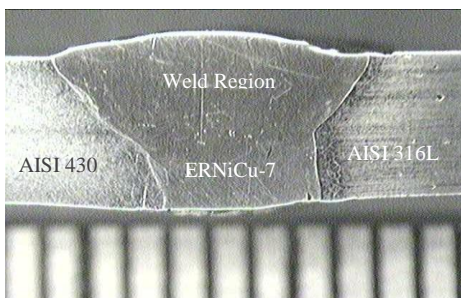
Macrostructure of the GTA weldments of dissimilar weldments employing ERNiCu-7
